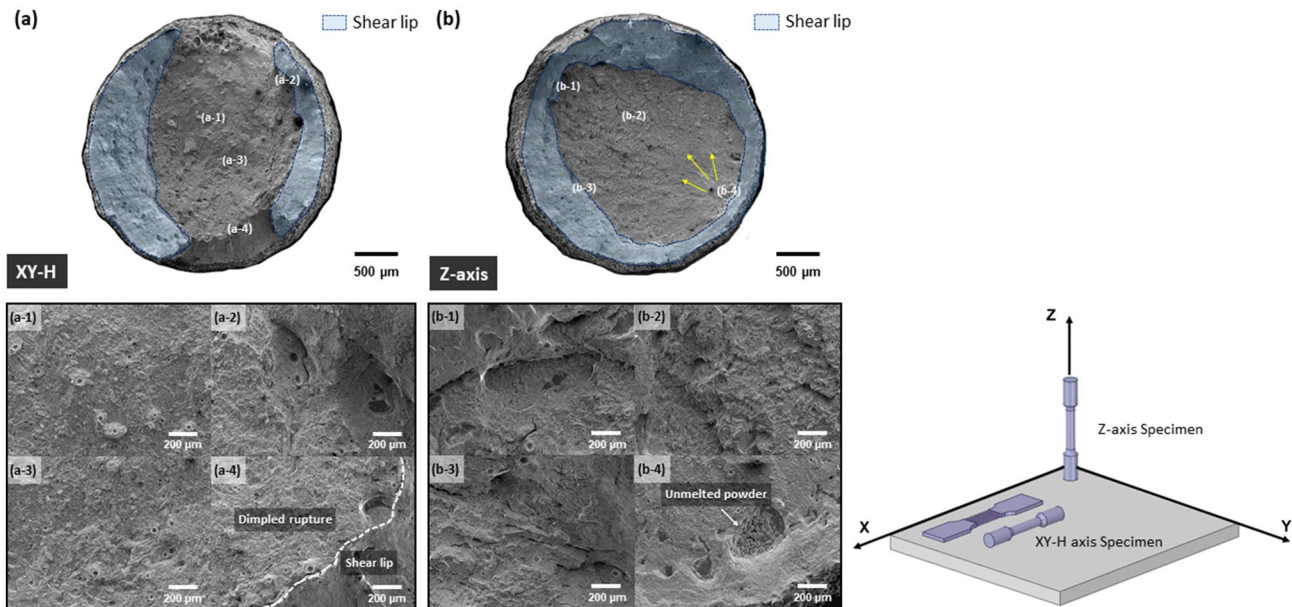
Fractography of the tensile test specimens. a XY-H axis, b Z-axis
